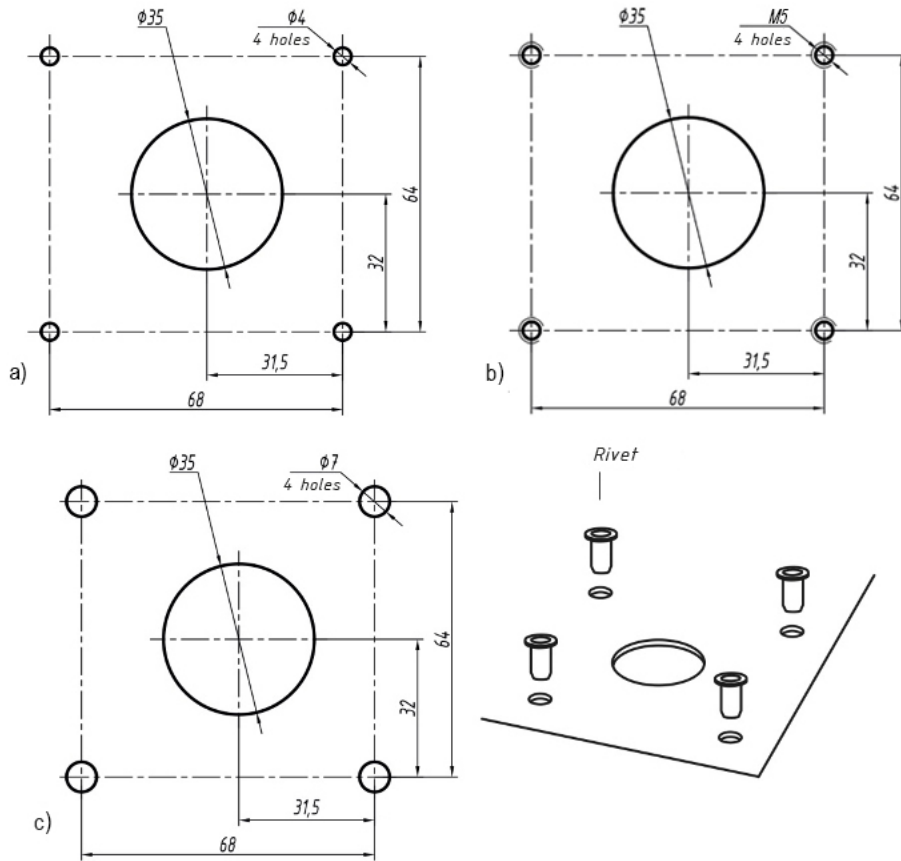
Dimensions: a) for mounting on self-tapping screws;
